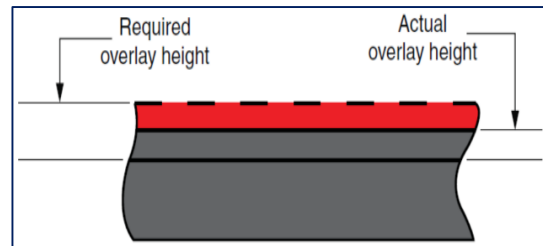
An Overlay Weld Deposit with Insufficient Height [111]
